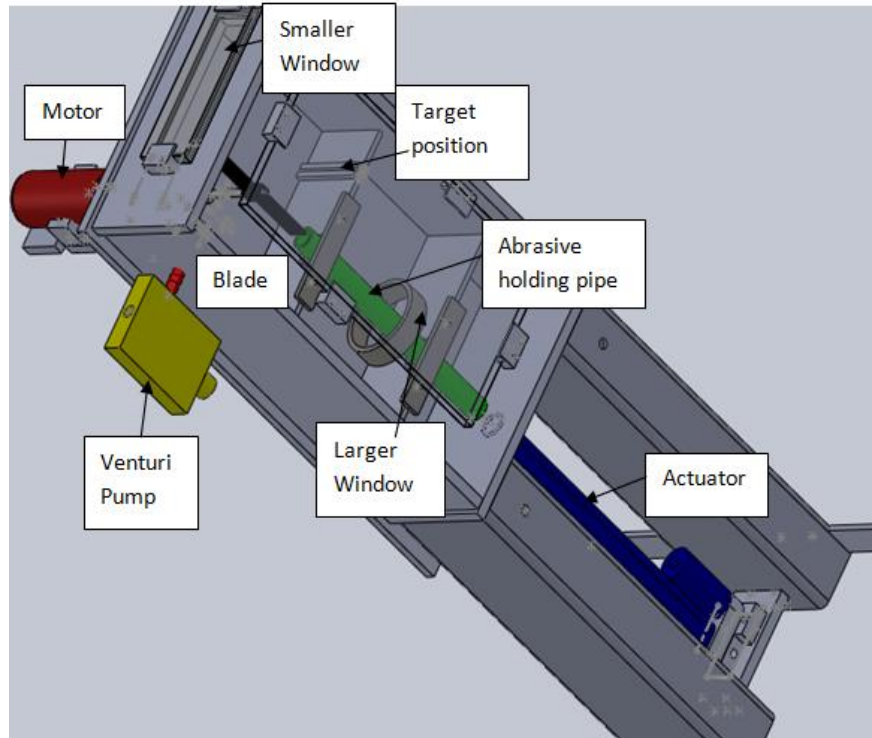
Initial design of the vacuum chamber and particle acceleration mechanism.
